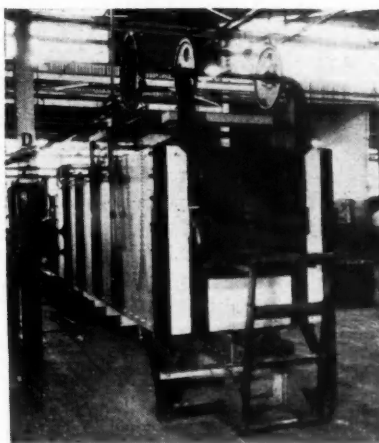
Charging end of electrically heated V-groove hearth pusher type furnace for rollers, pins, and bushings. Capacity 800 lb. per hour used at 1350-1450° Fahr. + +
